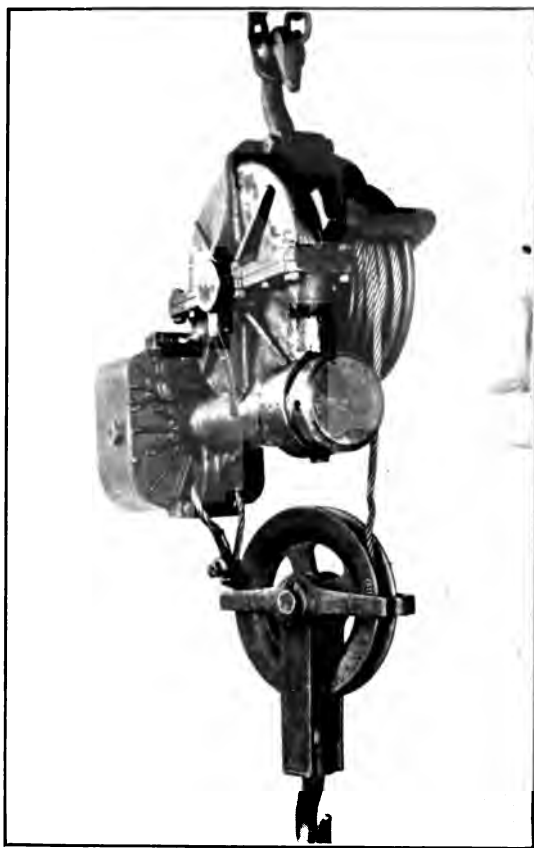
STANDARD MOTOR BLOCK AND TACKLE, DESIGNED AND BUILT IN TOPEKA TOOL-ROOM. AN EXAMPLE OF CAPACITY FOR REFINED MANUFACTURE.
